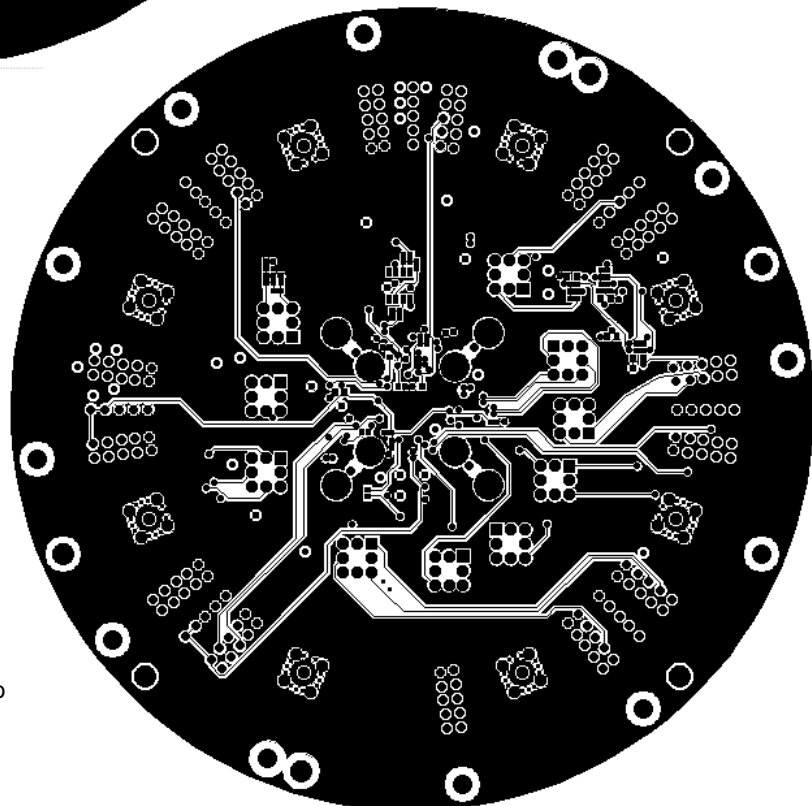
top view of board. The SMA coaxial connectors mount to this side of the board.
